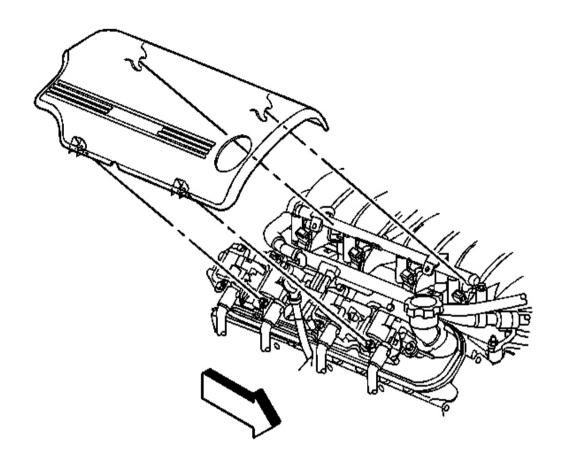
Fuel Rail Cover Courtesy of GENERAL MOTORS CORP.
